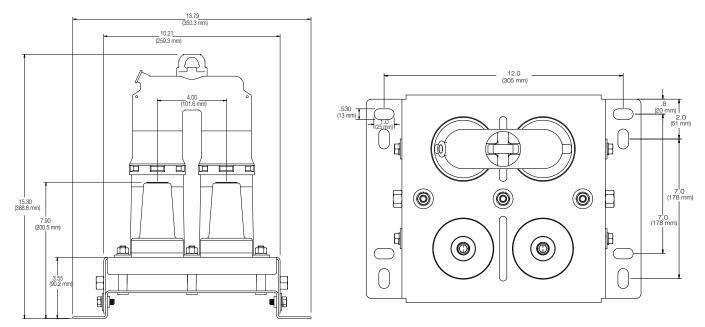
Dimensional drawing shows mounting configurations for square bracket.
